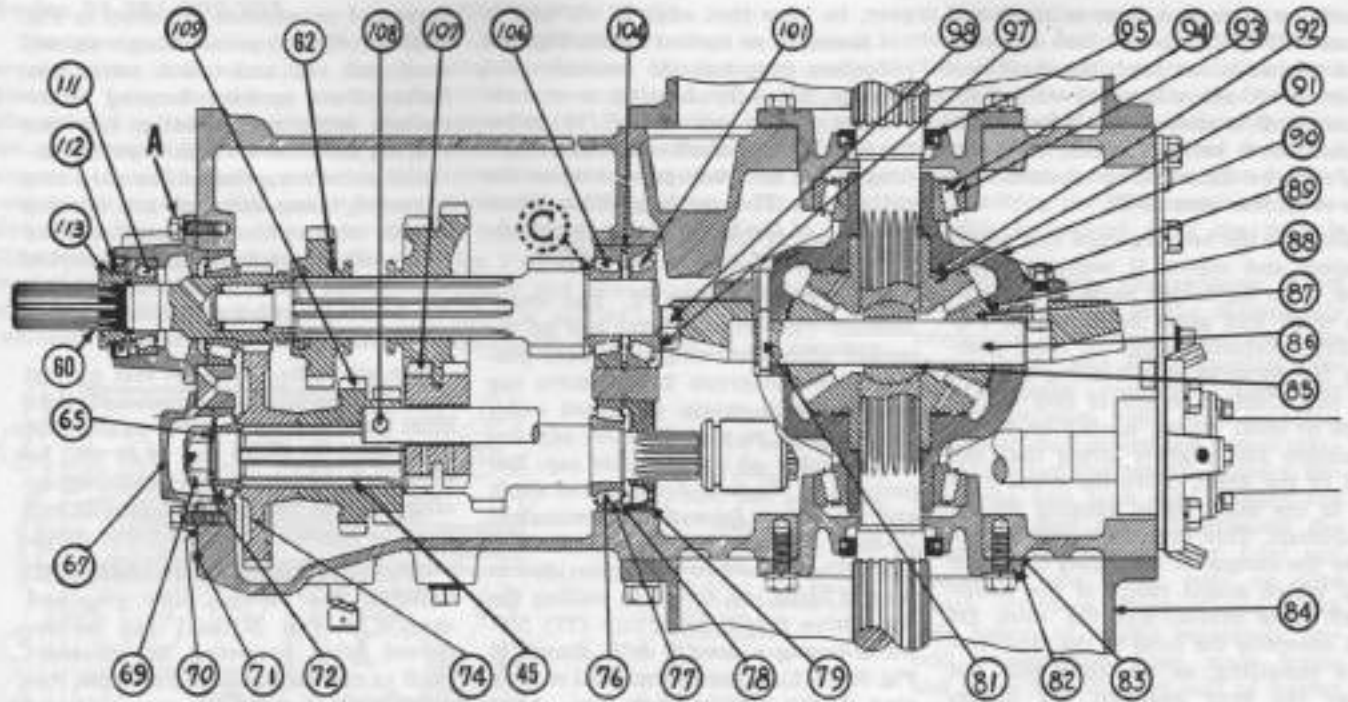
Transmission and differential assembly—Top view—Models 20, 20K, 22, 22K, 81 and 82.
